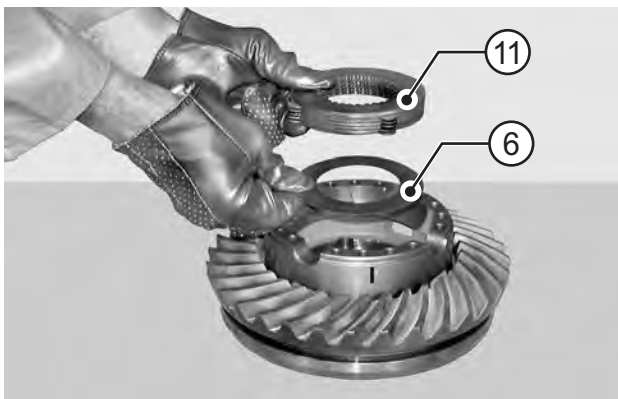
Remove the 2nd clutch pack (11) and shim set (6).
